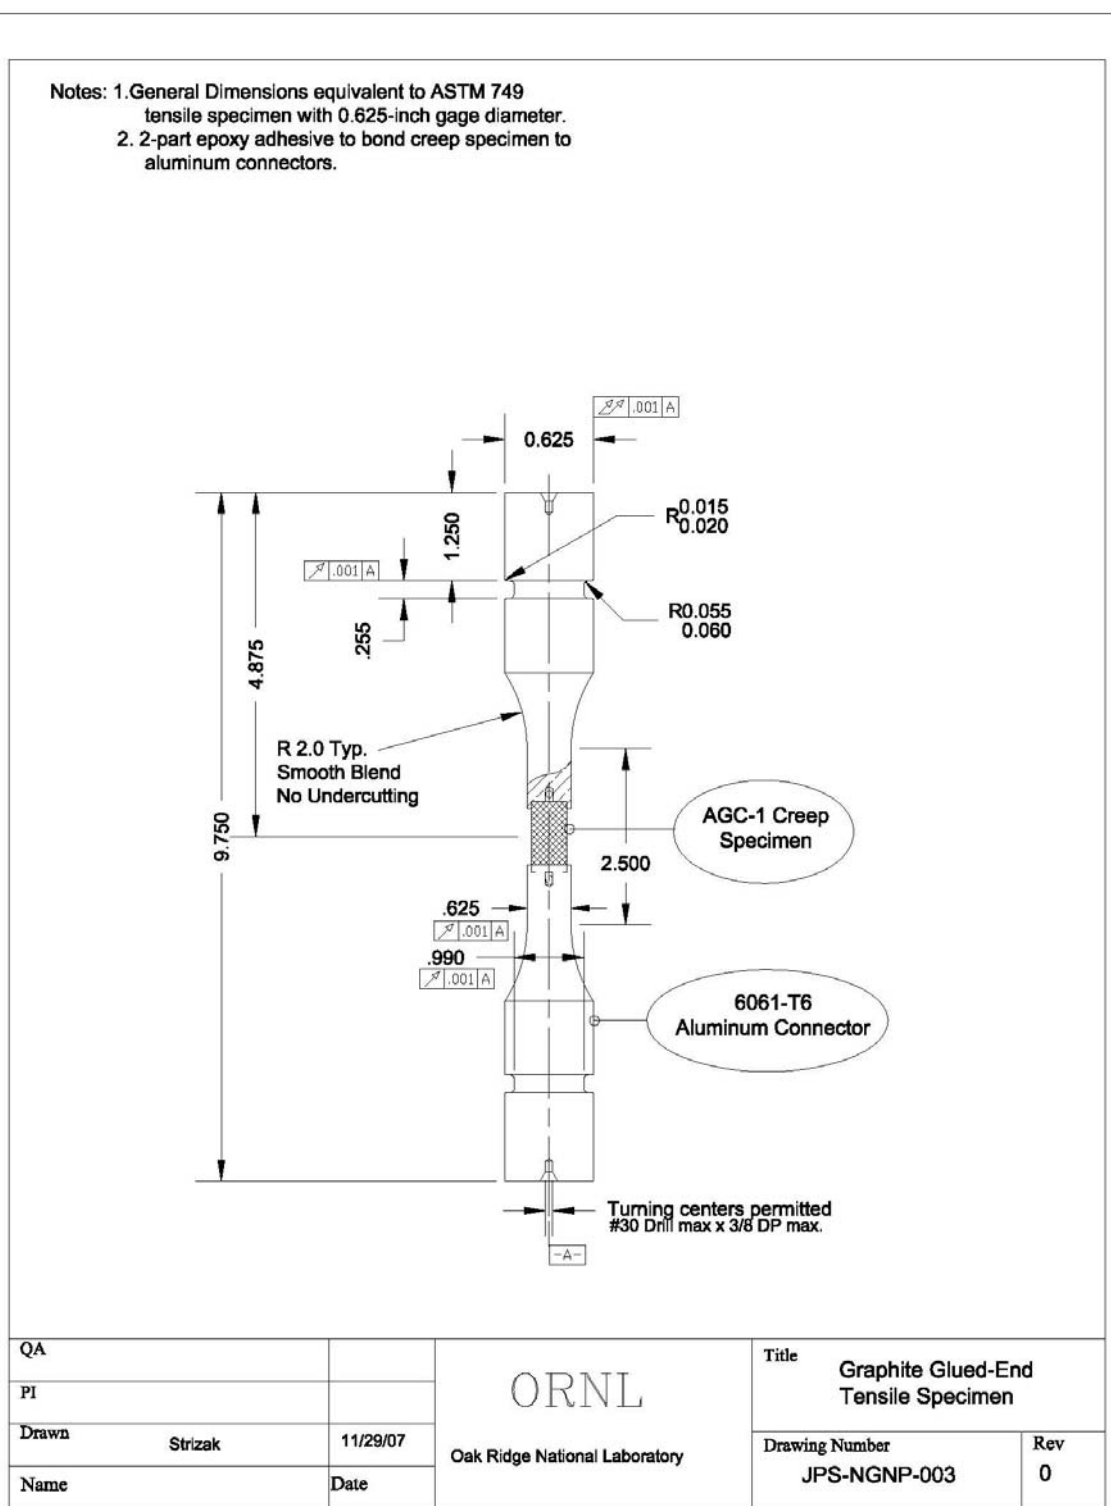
Engineering drawing of the glued end configuration for tensile testing of the AGC-1 “sister” specimens
